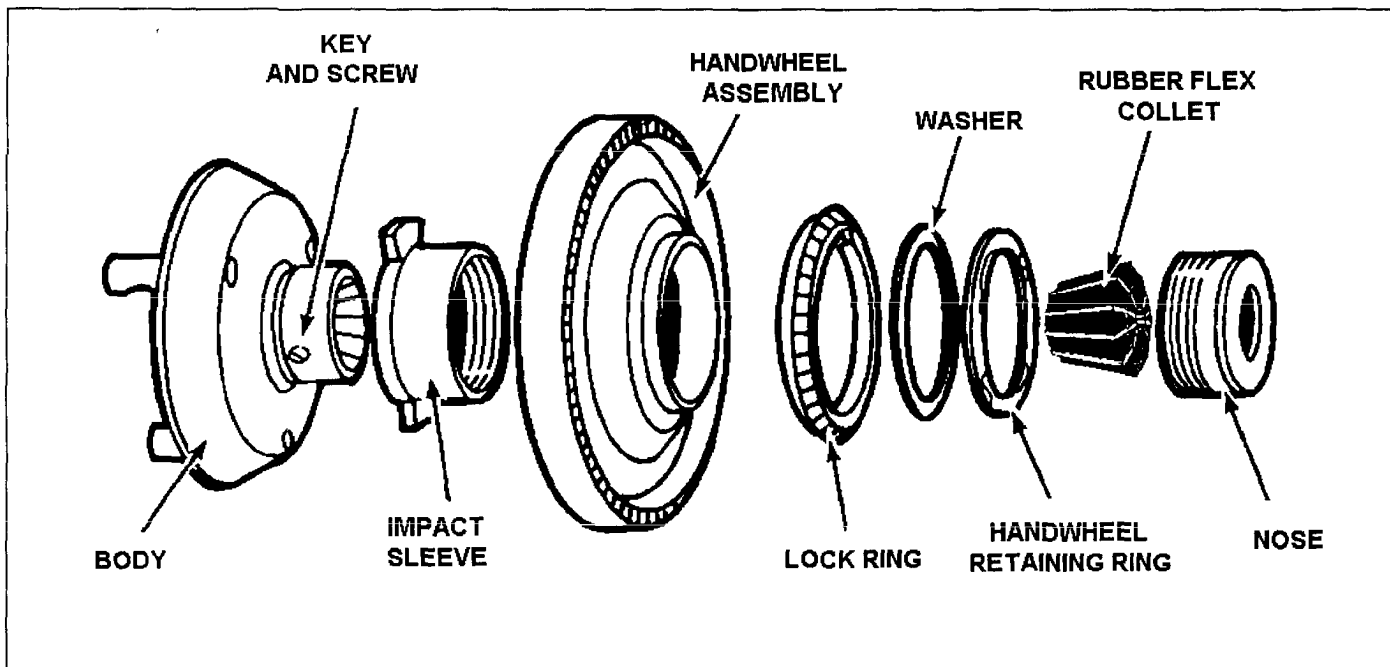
Jacob's spindle nose collet chuck and rubber flex collet.
